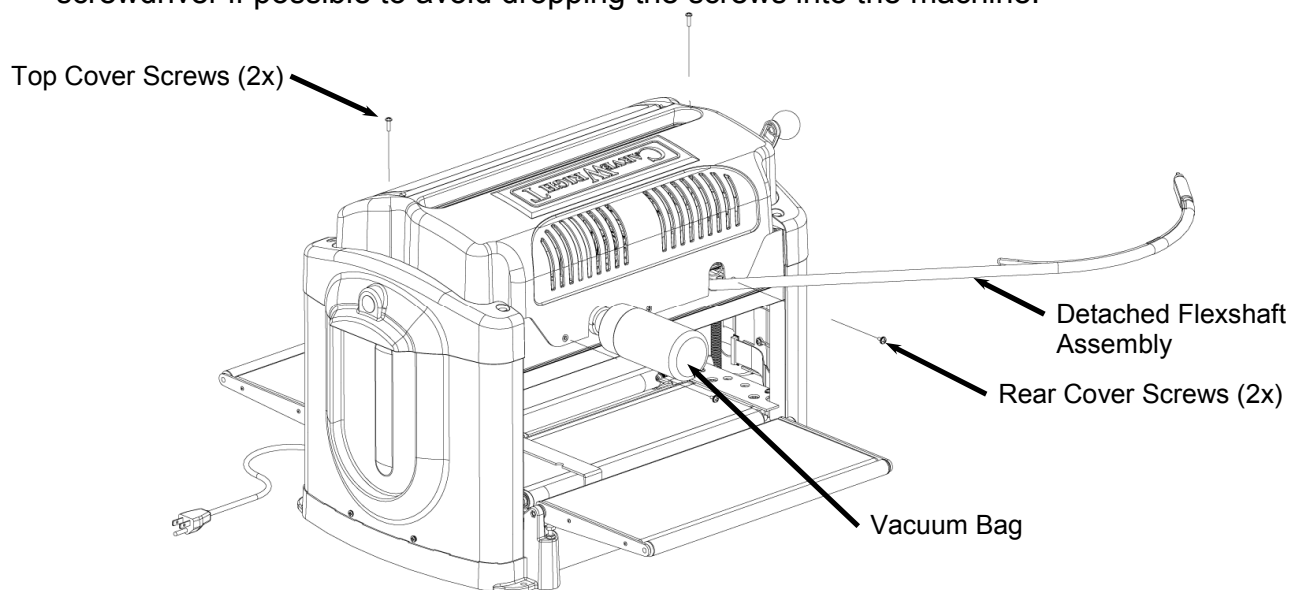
EXPLODED VIEW OF THE COVER SCREWS
